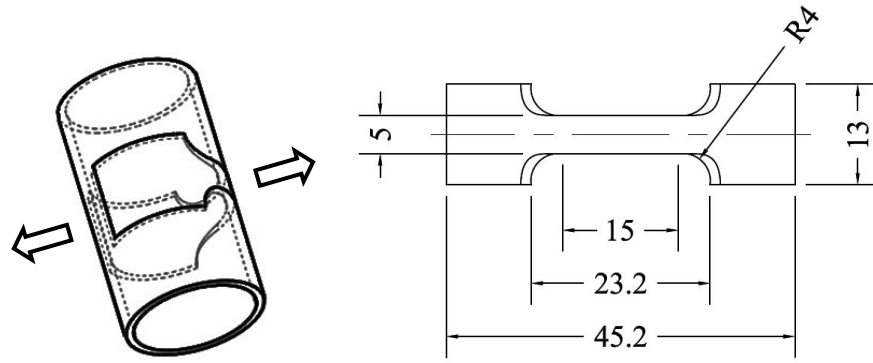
Dimensions of the tensile specimen cut along the hoop direction.
